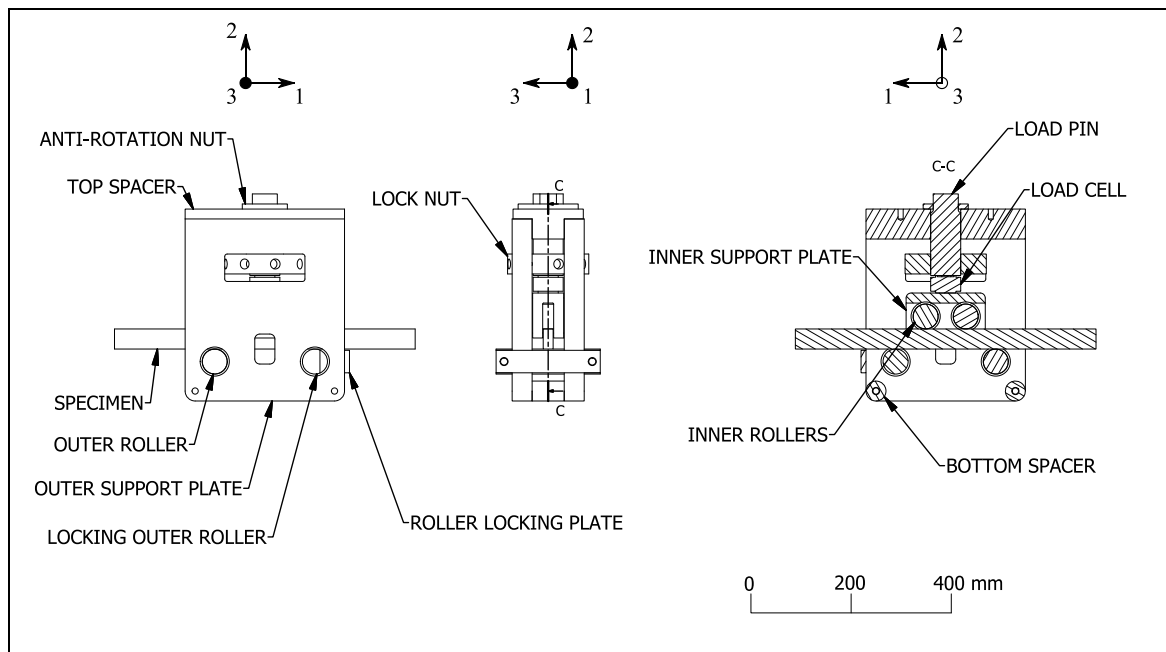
Assembly drawing of the fixed-displacement four-point bending fixture.
